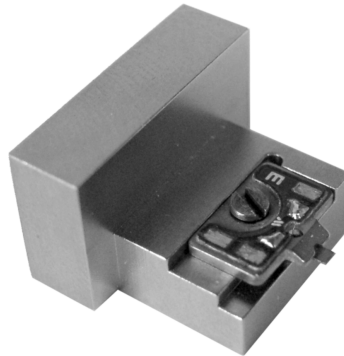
Block shaped jig allows precise mounting and easy manipulation (e.g. head replacement and inspection at microscope).
